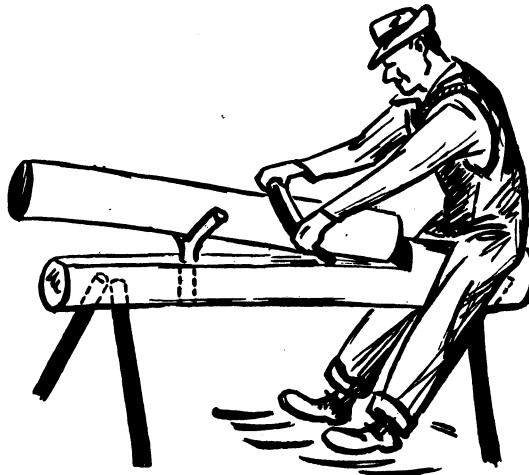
A shaving horse is often used to hold the wood being peeled.
